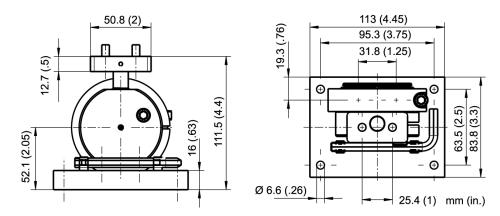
Mounting Flange for ThermoJacket (E-MF)
